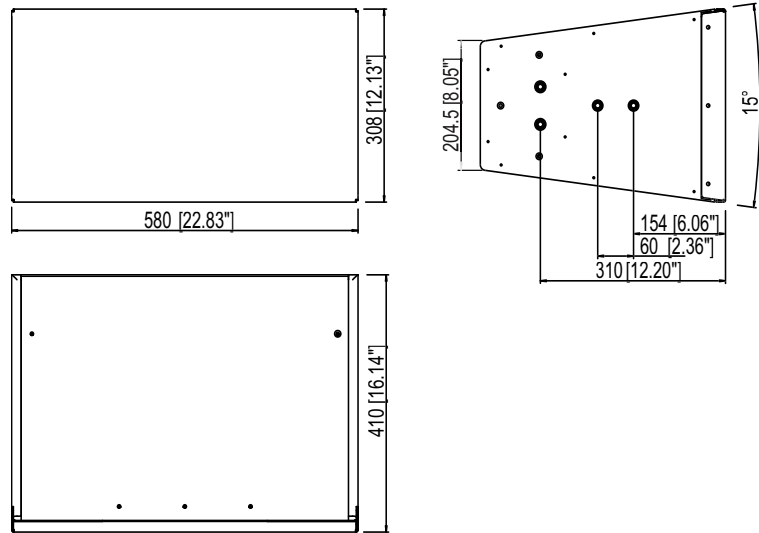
Qi10 cabinet dimensions in mm [inch]
